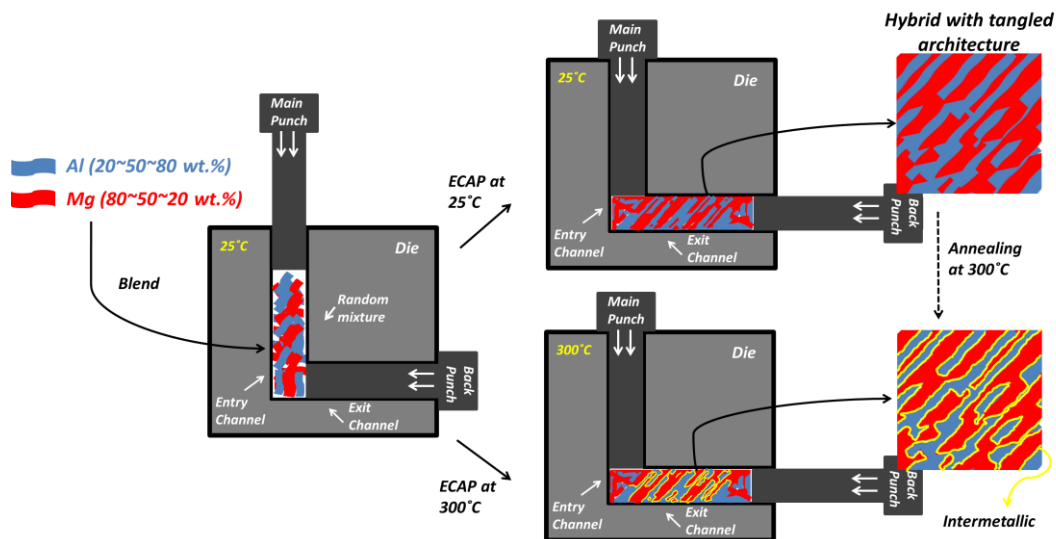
1 Schematic illustration of the processing chain of the first sub-project – using ECAP to fabricate metal-metal composites and intermetallic-metal composites from machining chips
